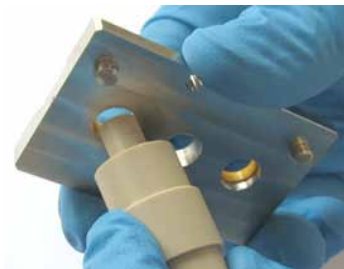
Inserting the piston seal into the plate of the rear seal wash system
